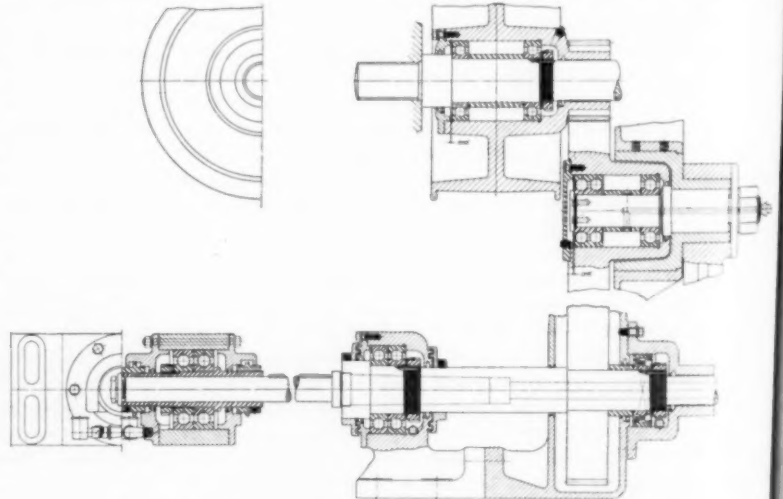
APPLICATION OF BALL BEARINGS TO A MILLING MACHINE
